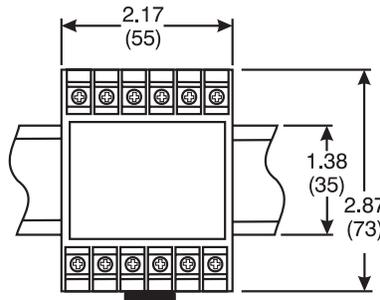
BE3 Case Size in Inches (millimeters) (Front View)
